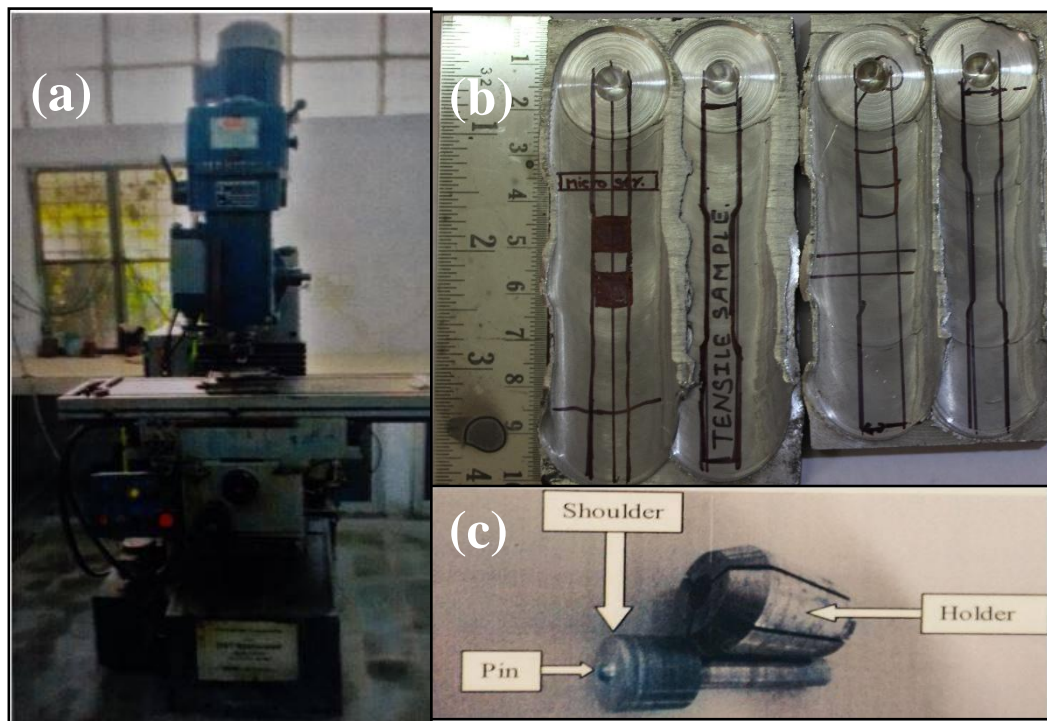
(a) FSP machine (b) composite sample after FSP (c) FSP tool and tool holder
